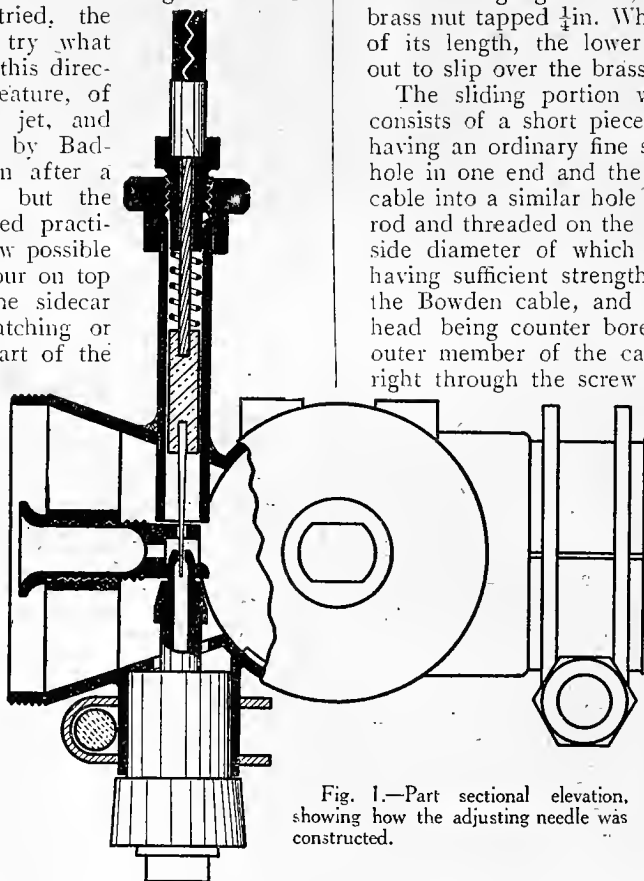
Part sectional elevation, showing how the adjusting needle was constructed.
